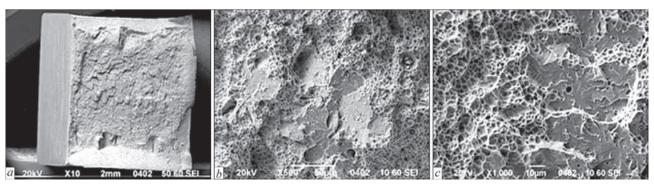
Fractographs of fracture surface of 09G2S steel weld metal specimen after impact bending test at a temperature of -20 °C
